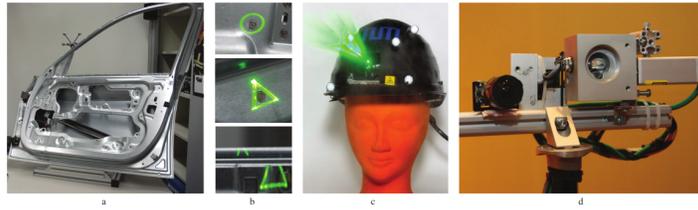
(a) A white body of a car door, with about 50 welding points; (b) Projected images onto the white body; (c) First prototype of a laser projector: head-mounted, integrated into a helmet; (d) Second prototype: tripod-mounted, consisting of a wide angle camera for optical tracking, a galvanometer scanner and a 1 mW laser (from left to right) [27].
